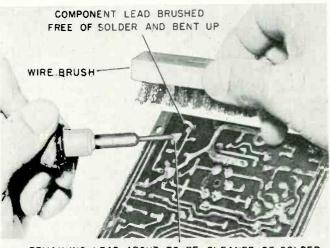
Use a soldering iron of 35 watts, or less. Excessive heat
